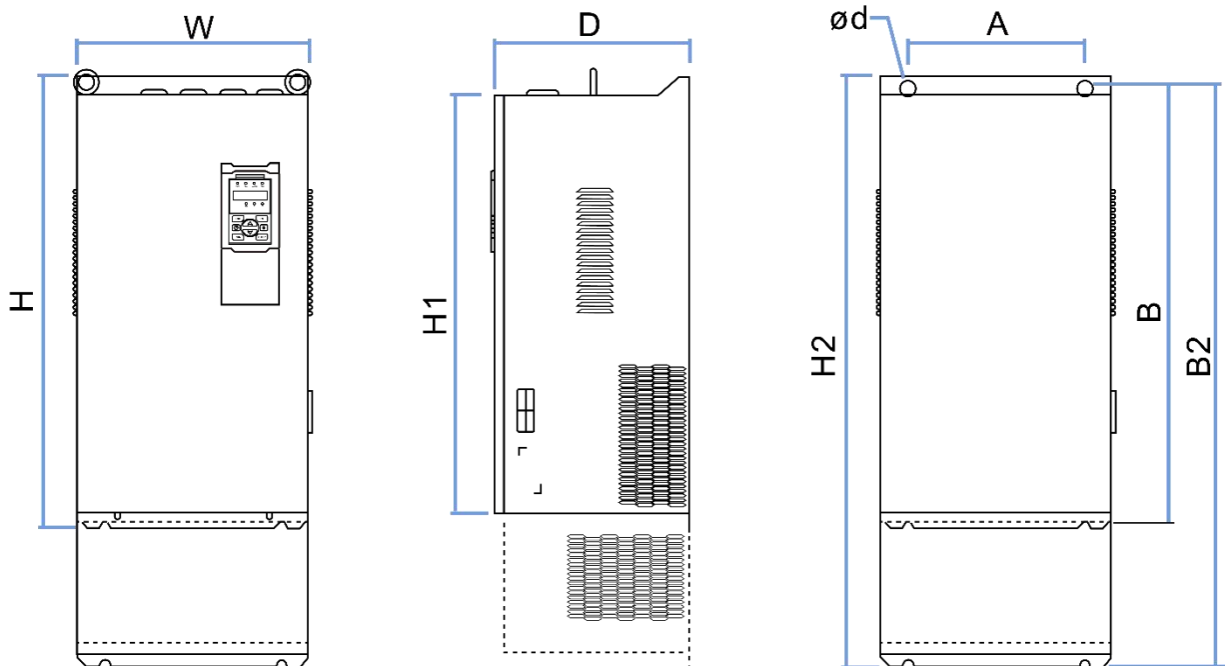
SIZE H~J(110KW-250KW) Dimension
